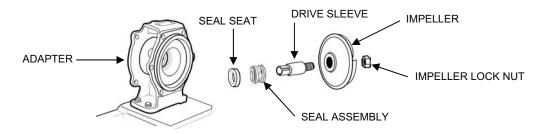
Drive Sleeve, Impeller, and Seal Assembly.
